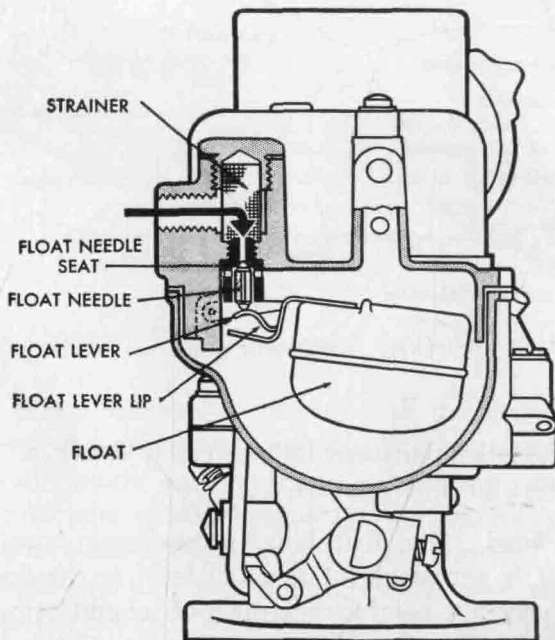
Sectional view of a carburetor, showing float system. Fuel enters as shown by curved arrow. (Studebaker-Packard Corporation)
